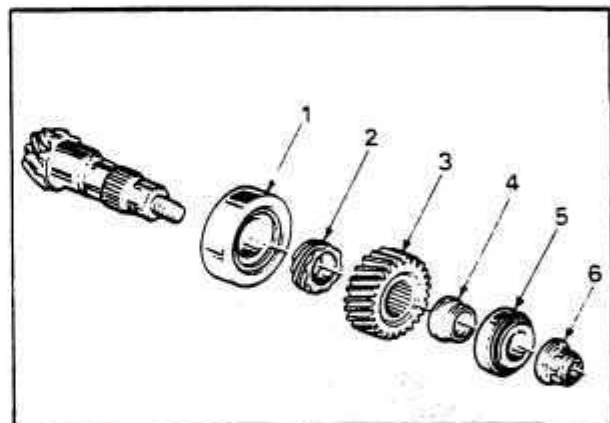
FINAL DRIVE PINION ASSEMBLY
